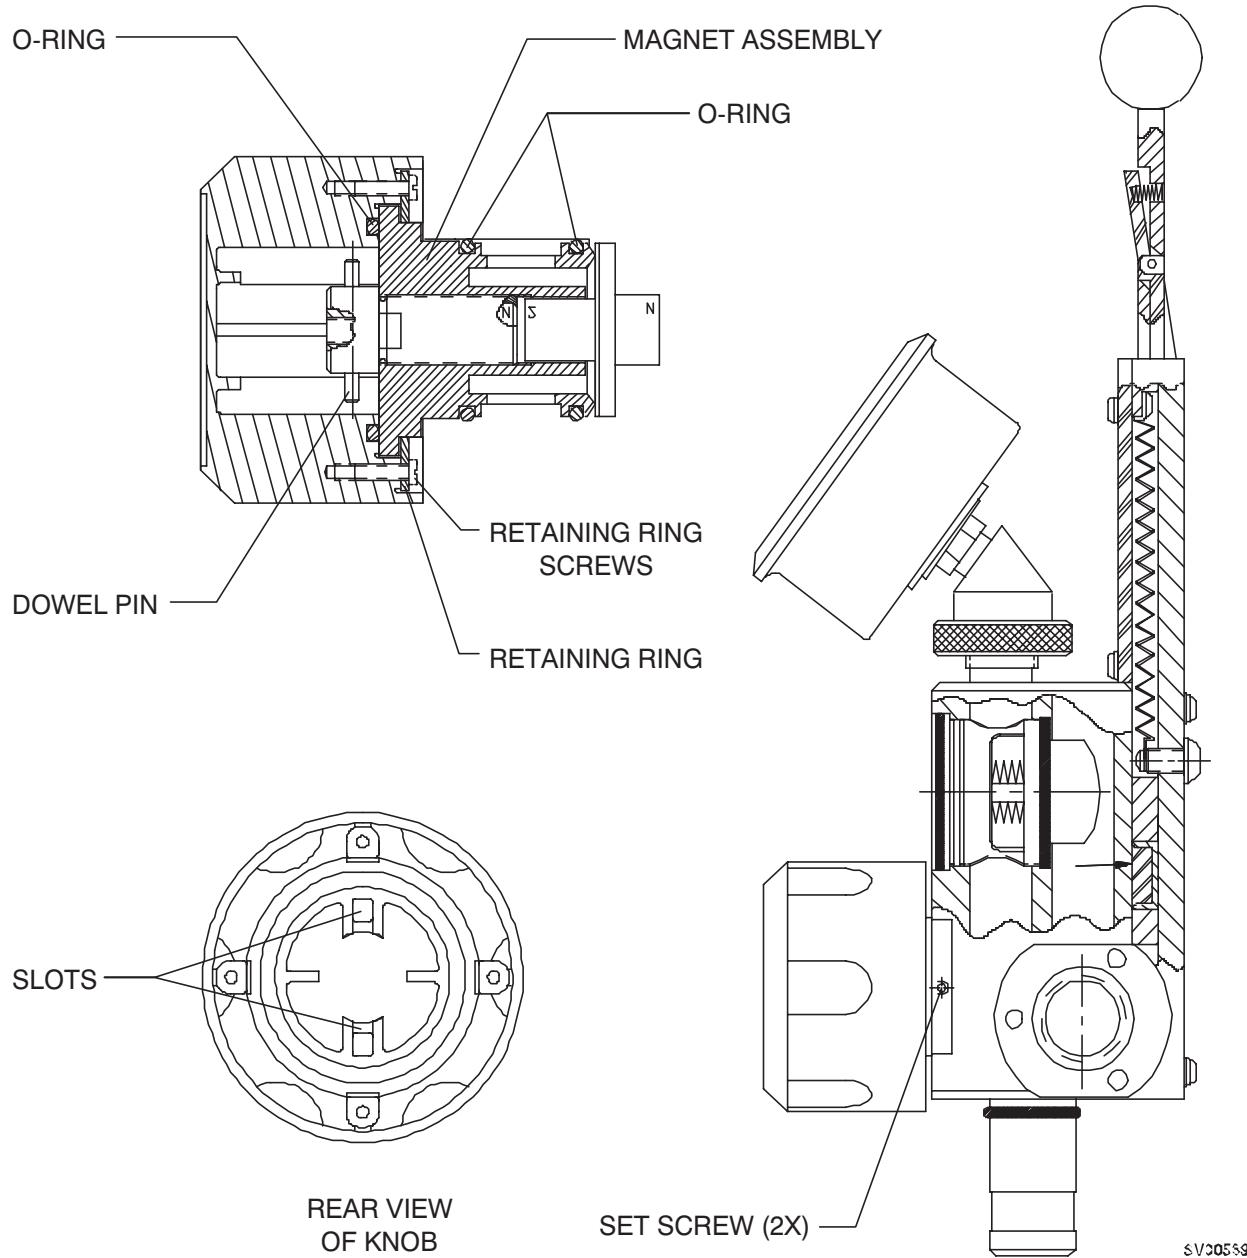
PEEP Valve Magnet Assembly Replacement
